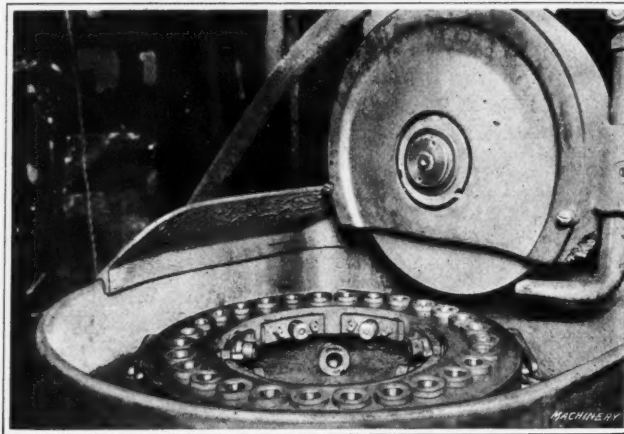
Method of holding and surface grinding Top Flanges of Bushings
